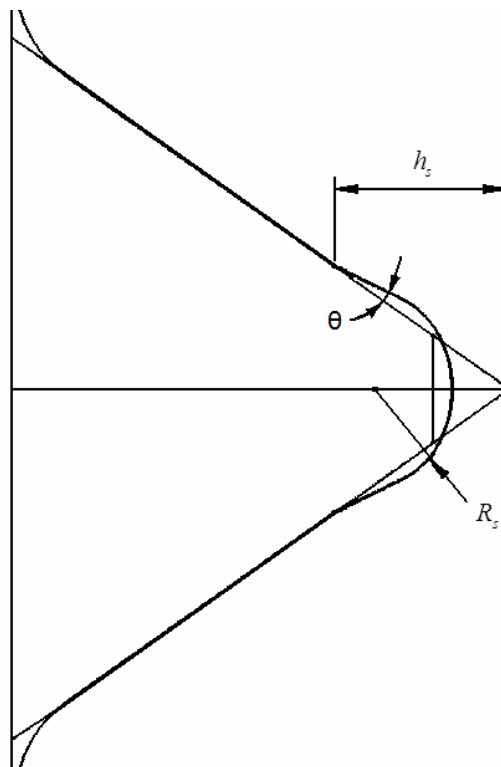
Novel thread form applied to ISO metric bolt thread
